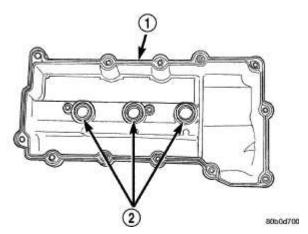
Identifying Cylinder Head Cover Gasket & Spark Plug Seals Courtesy of CHRYSLER LLC
